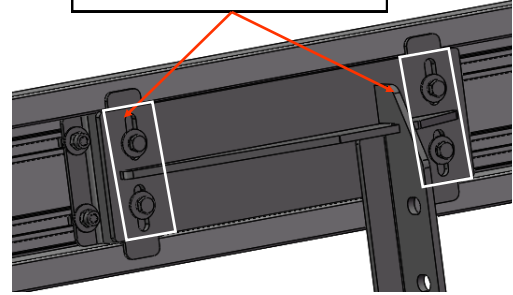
Slide & line up the U-Slider with the installed mounting brackets along bottom channel
